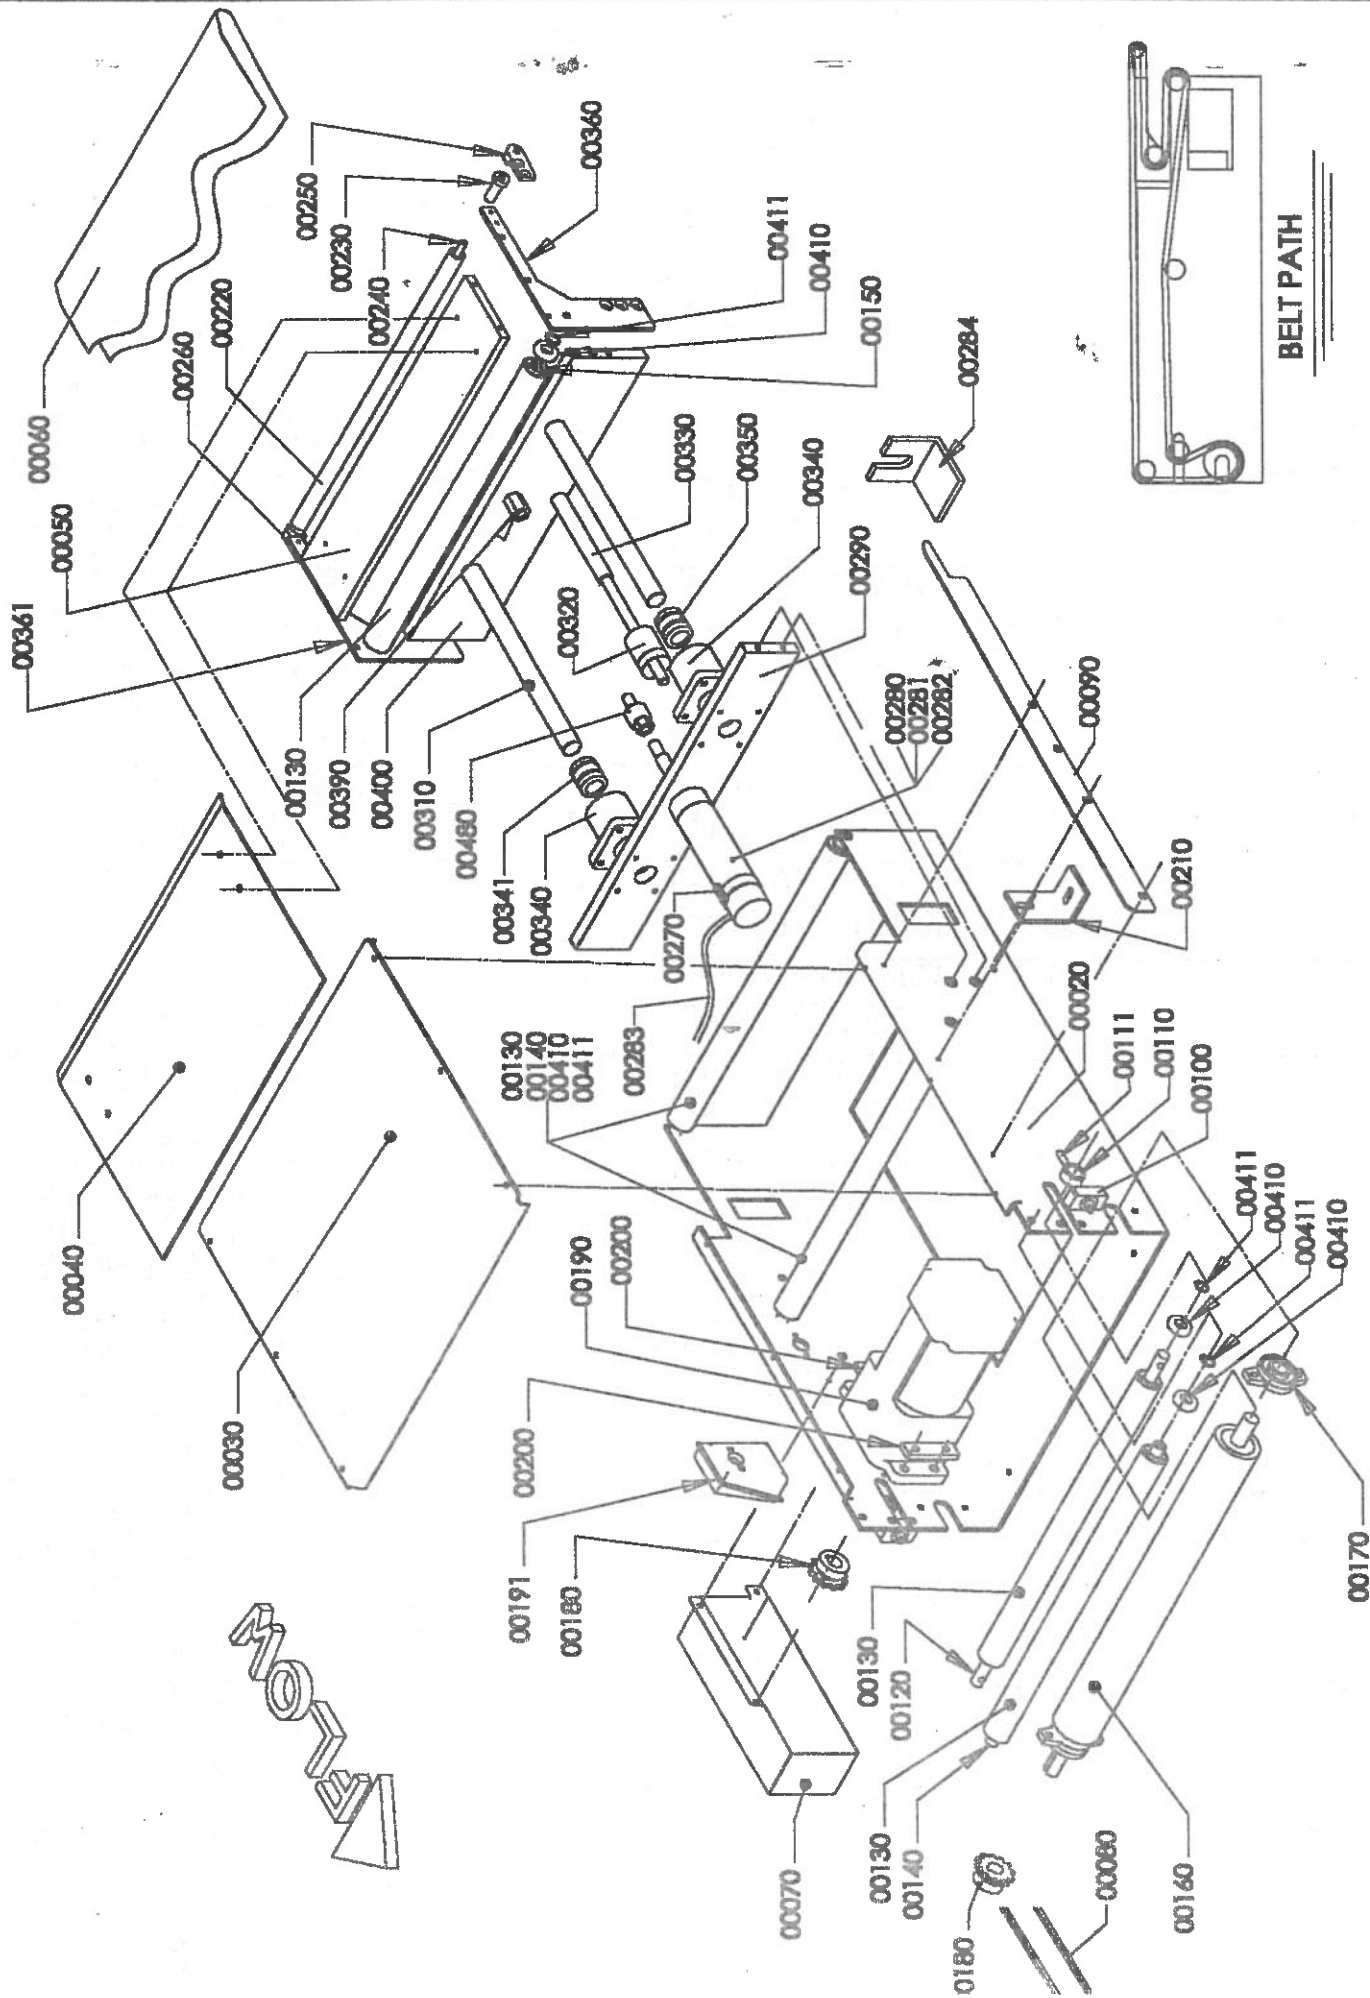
INFEEED CONVEYOR ASSEMBLY(Cont.)
